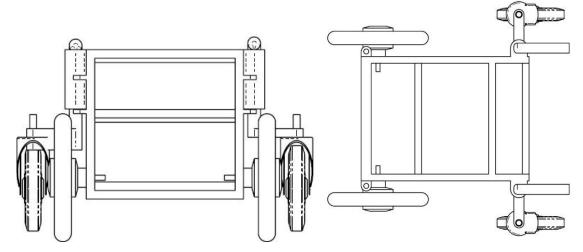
The mechanism for changing the overall width due to the console fork of self-aligning (rear) wheels (maximum overall size)
